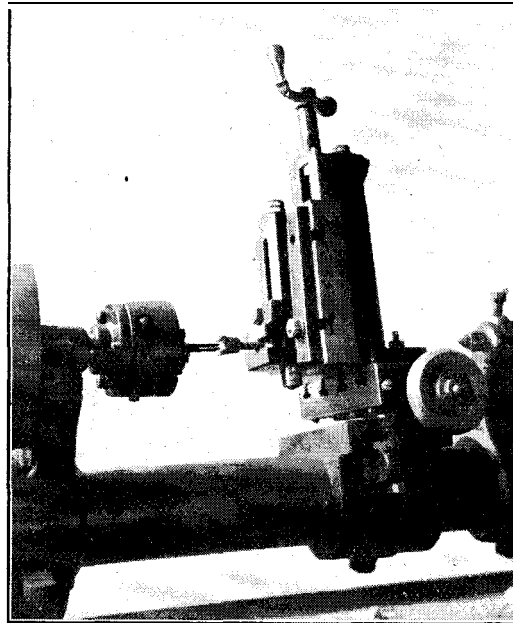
Setting a Model Connecting-Rod for Slot Milling the Knuckle End.
